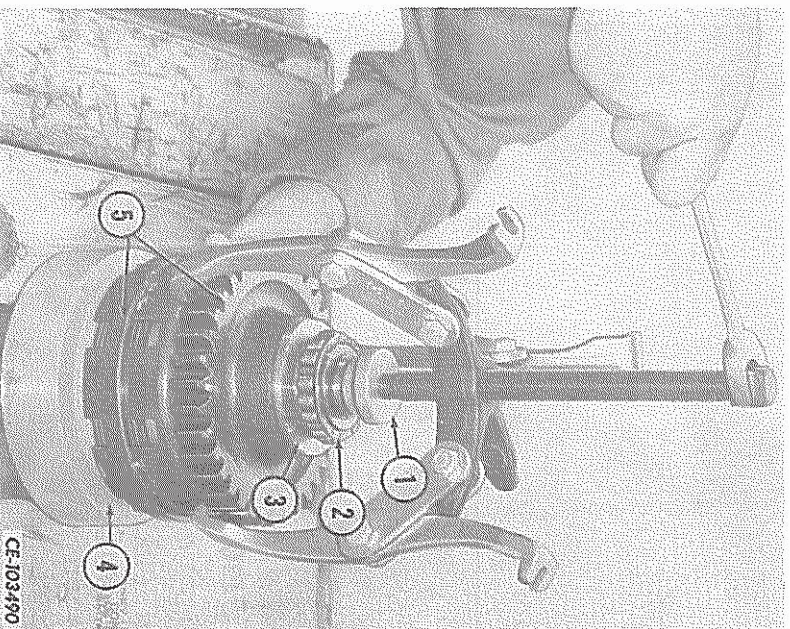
Removing the Clutch Gear and Drum Assembly
